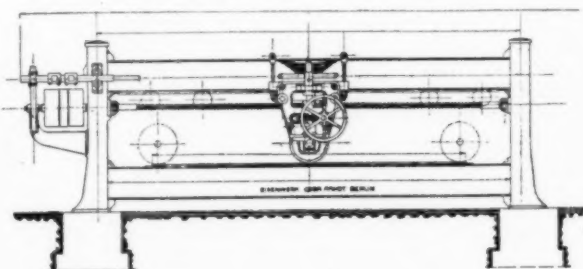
ARNDT'S SHEET ROLLING MACHINE.
